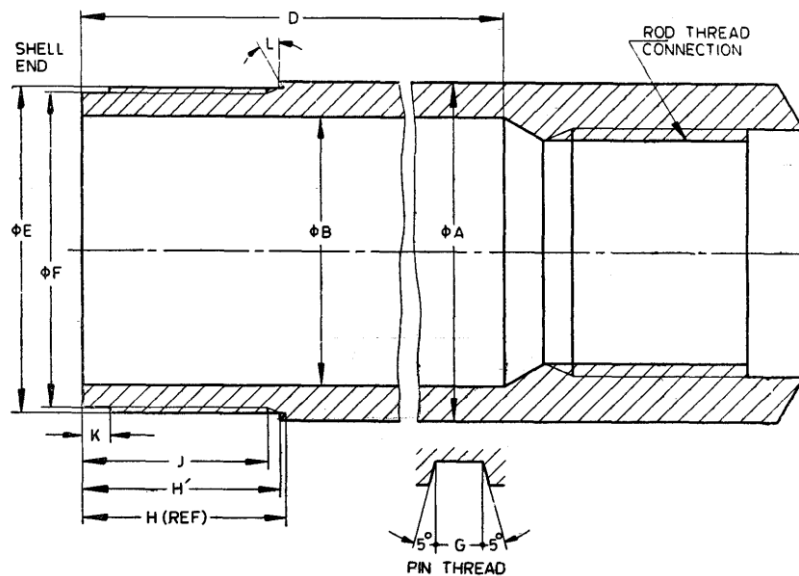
'WT' DESIGN SINGLE TUBE CORE BARREL — TUBE
